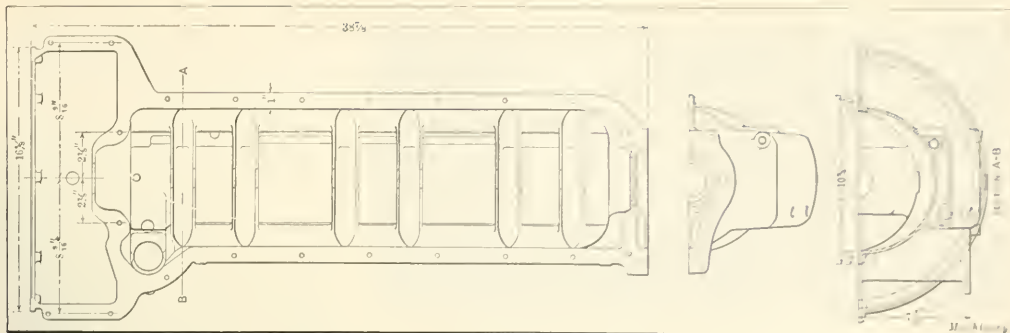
Design of Lower Half of Crank-case for Buick Motor Car
